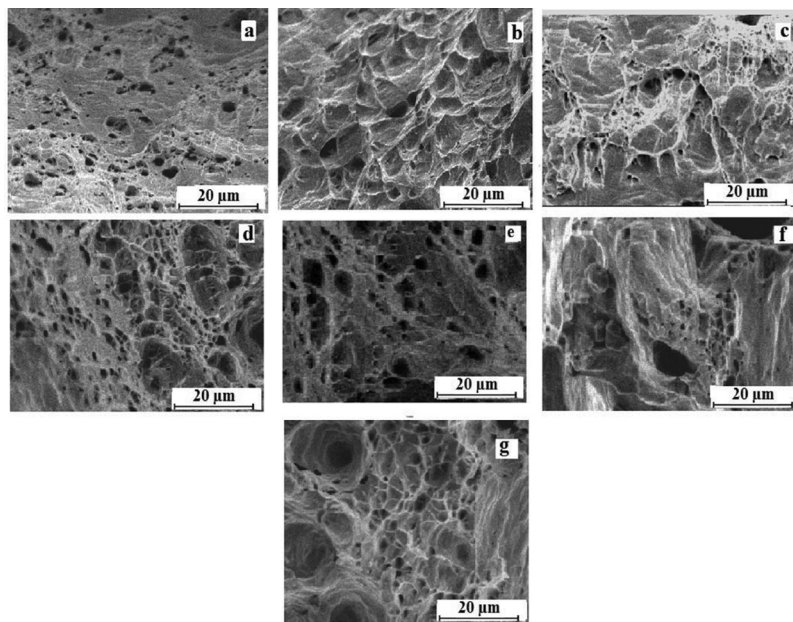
Fracture surface of tensile samples: (a) TC, (b) TT, (c) TR, (d) SQ, (e) PT, (f) HX tool pin profiles, and (g) BM.
